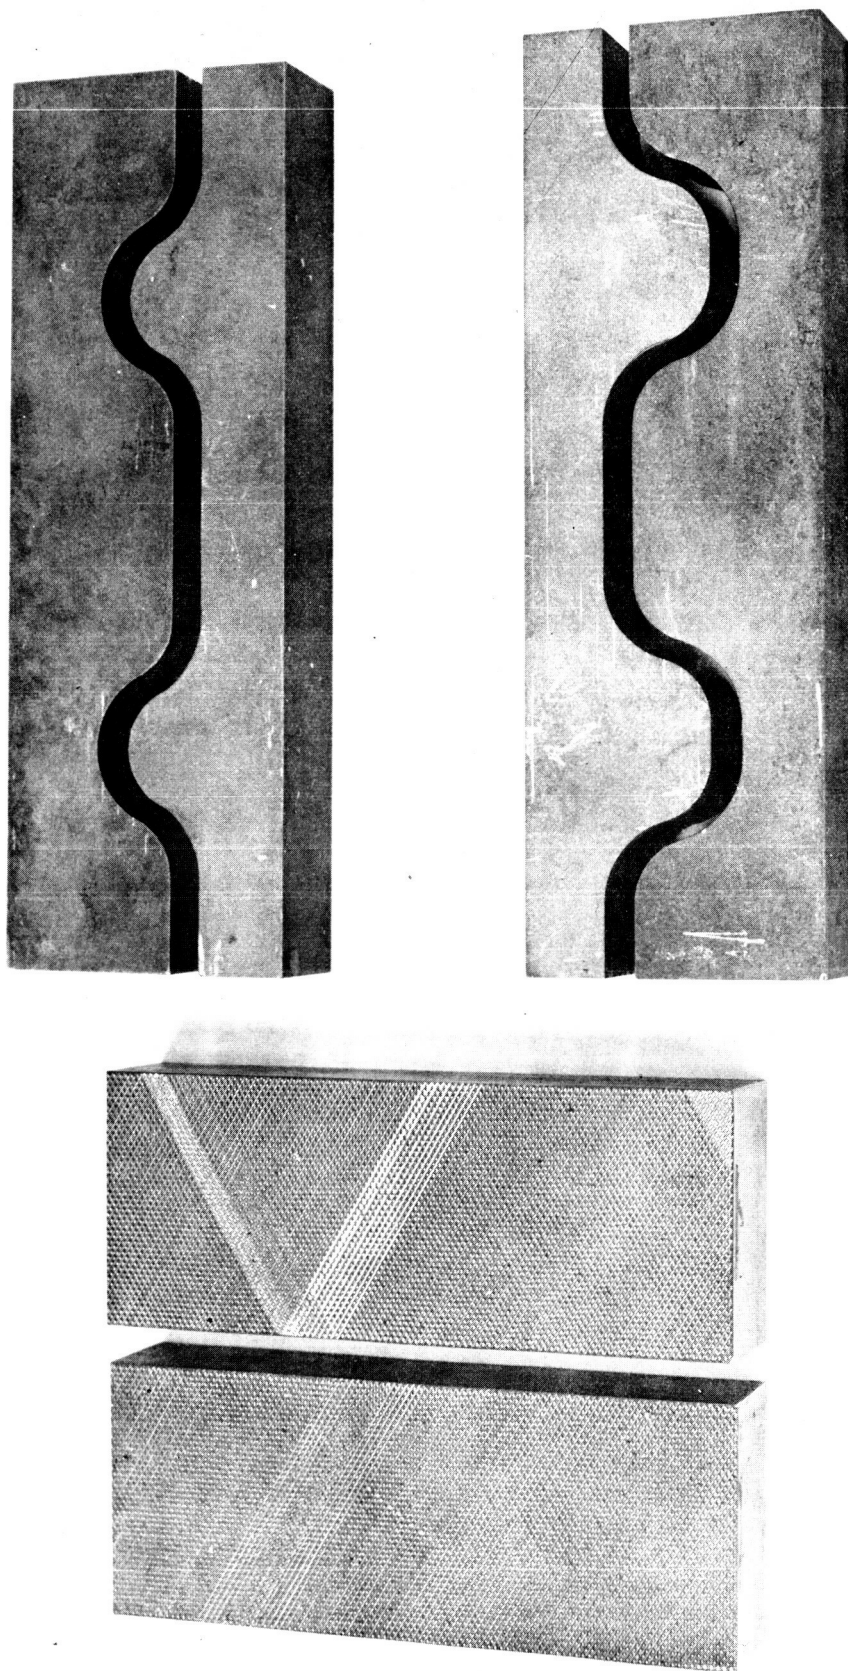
Edge Restraint Fixtures for Uniaxial Mechanical Testing
